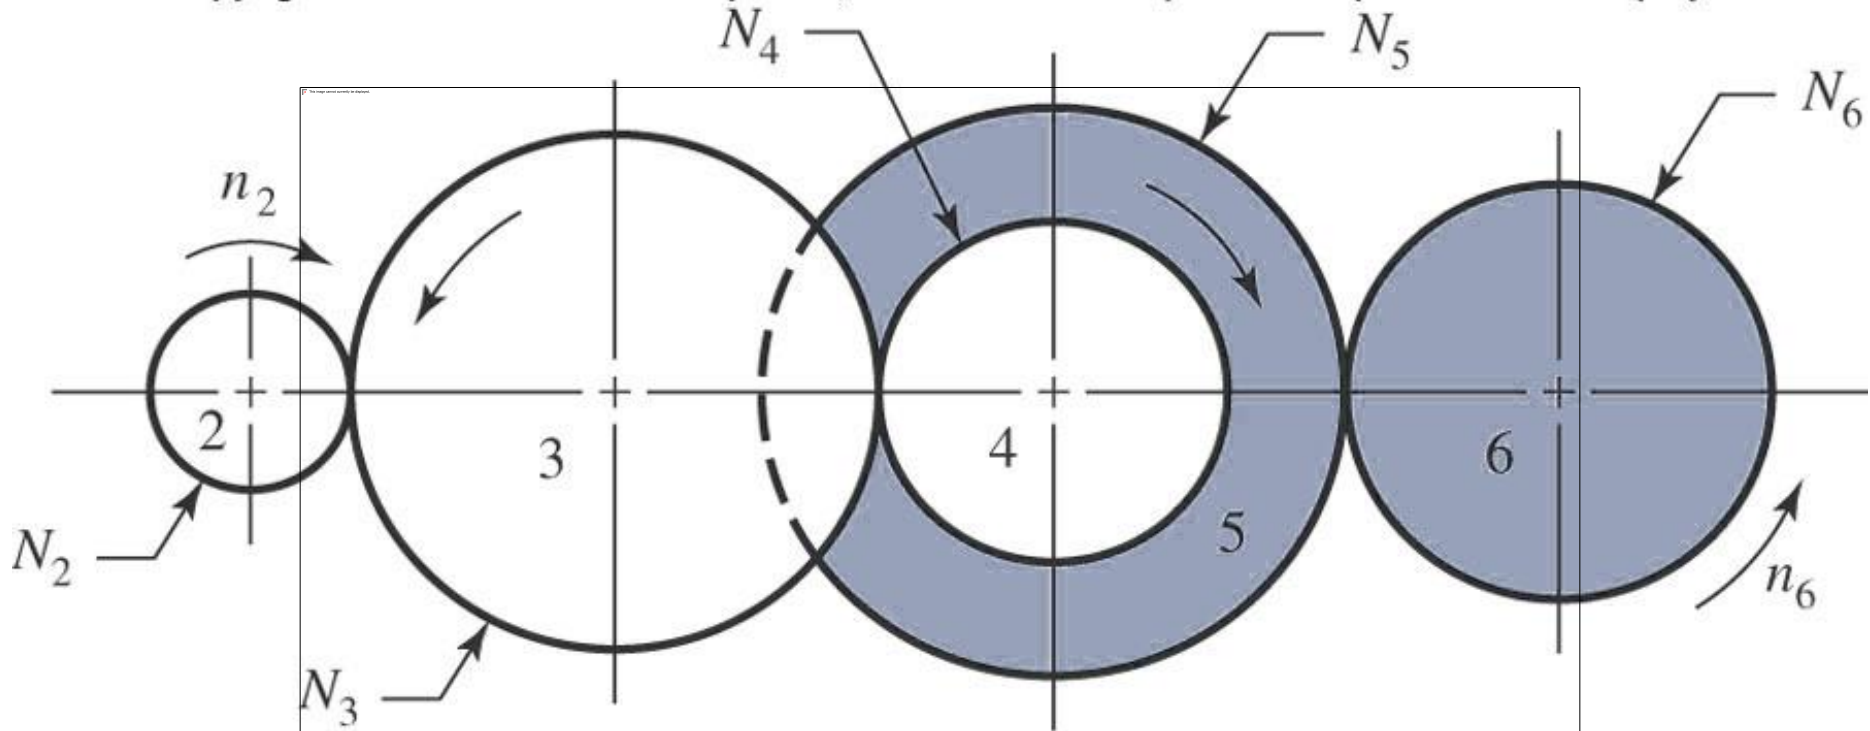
Gear trains. Gear 3 is an idler. 2,3,5 are drivers. 3,4,6 are driven members.
